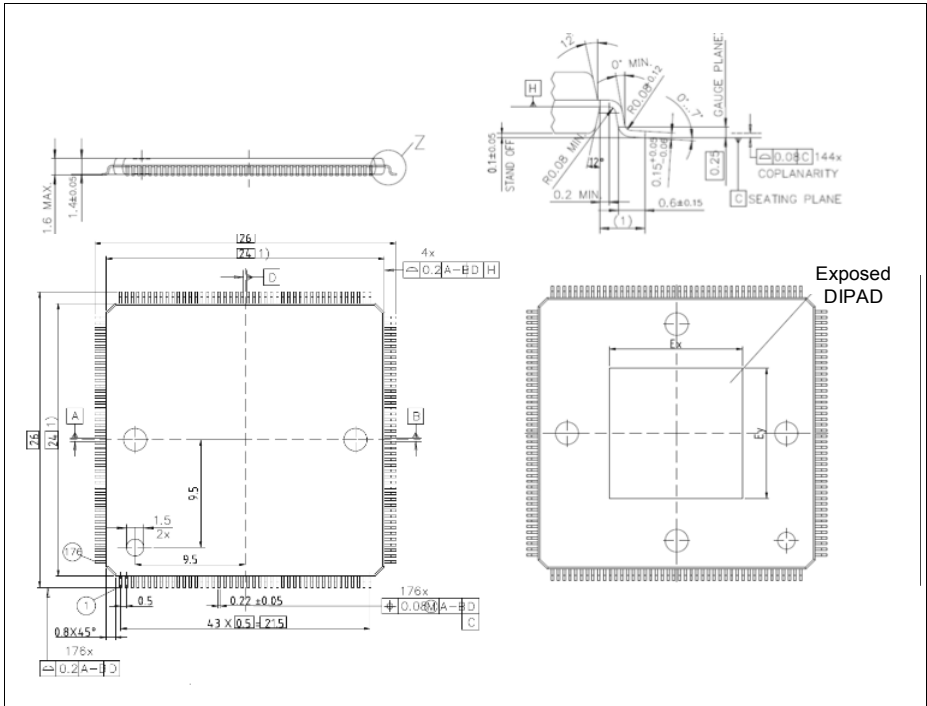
Package Outlines PG-LQFP-176-10 / PG-LQFP-176-20
